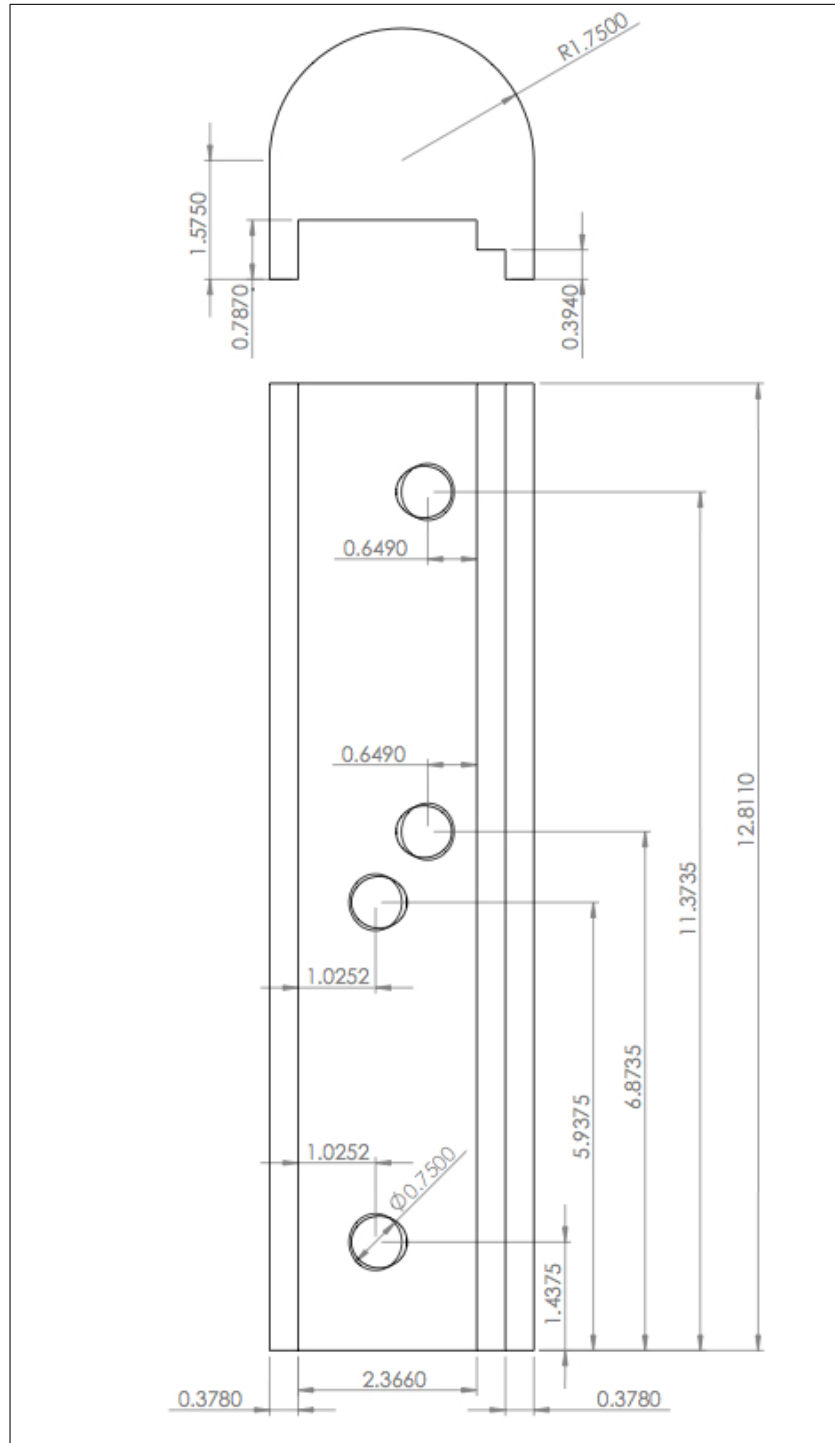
Dimensions shown for top and rear view of the leading edge model. Dimensions are in inches. The coolant hole plenums were milled on a 21.5° angle to the rear surface and threaded for 0.75" Swagelok connectors. Looking at the rear view, coolant flow is into the page.
